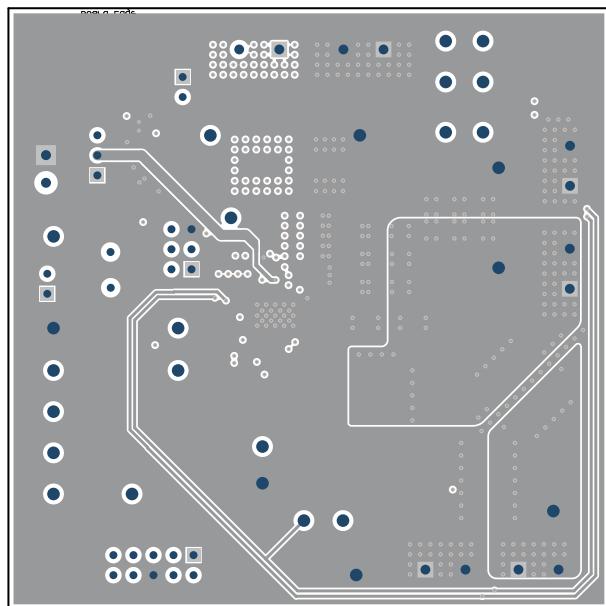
TPS546A24AEVM-1PH Bottom Side Component View (Bottom View)
